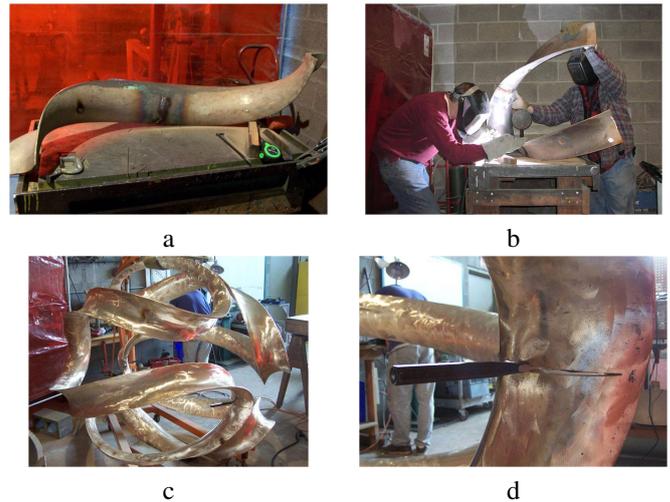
Pax Mundi* assembly: (a) fitting together two segments, (b) assembling one horse shoe, (c) assembly completed, (d) cuts with wedges to elongate sculpture.
